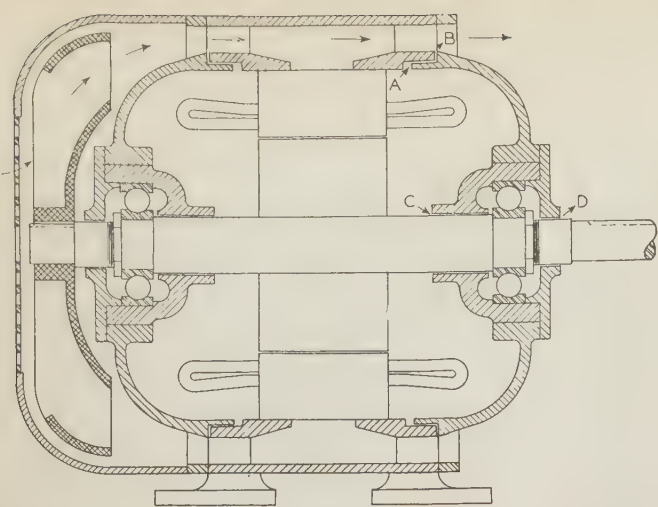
Cross section of a modern type of fan-cooled explosion-proof motor
